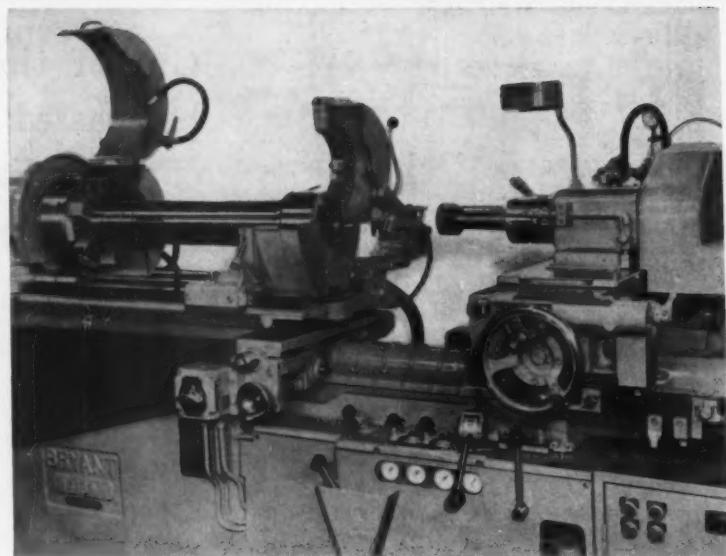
Close-up view of precision grinding setup on extra long Bryant 1416 internal grinder
